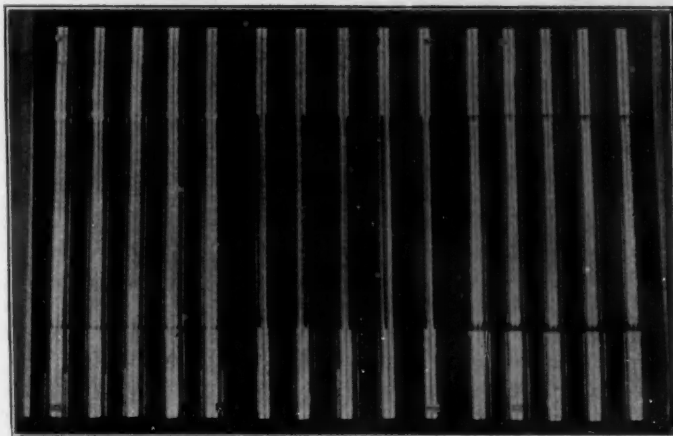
THE 15 SHAFTS WHICH WERE TESTED
